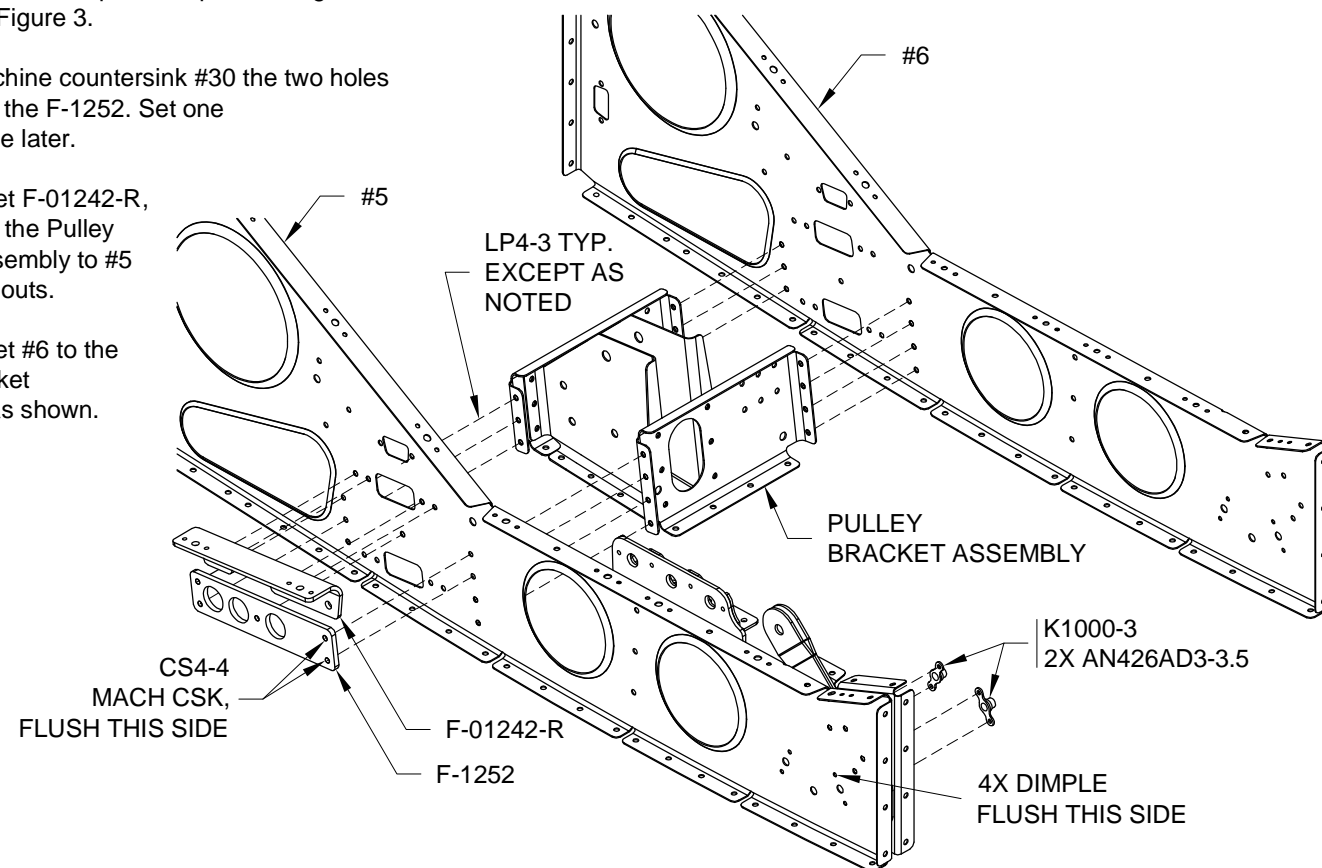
RIVETING PULLEY BRACKET ASSEMBLY TO RIBS #5 & #6
